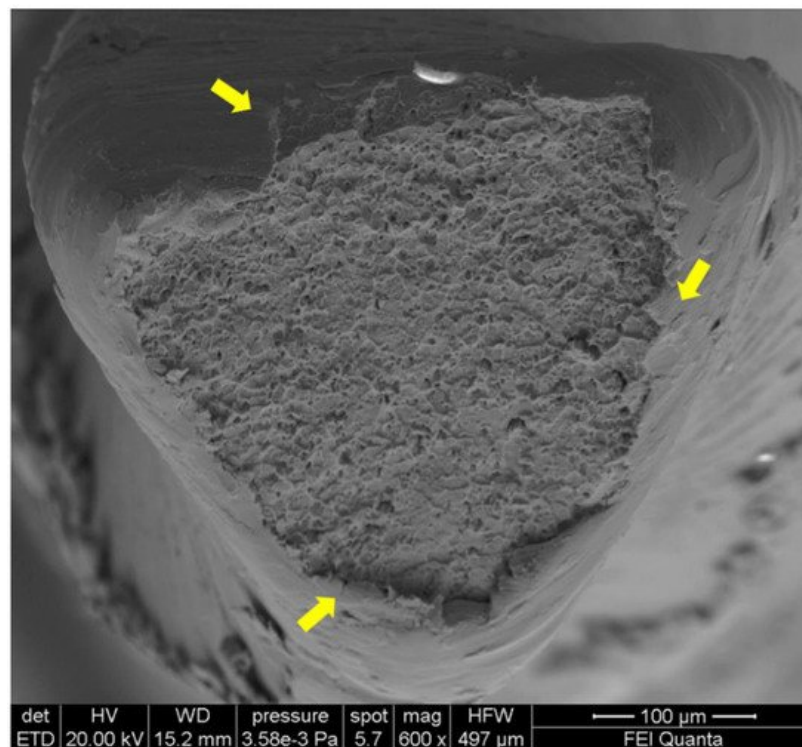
SEM image of fractured surface of a F2 EdgeTaper Platinum (Albuquerque, NM, USA) in a transversal view at $\times 600$ magnification after cyclic fatigue testing. Dimples and microvoids visibly spread on the fractured surface constitute a typical feature of ductile fracture, which originates from the external part of the instruments with visible crack (evidenced by yellow arrows).
